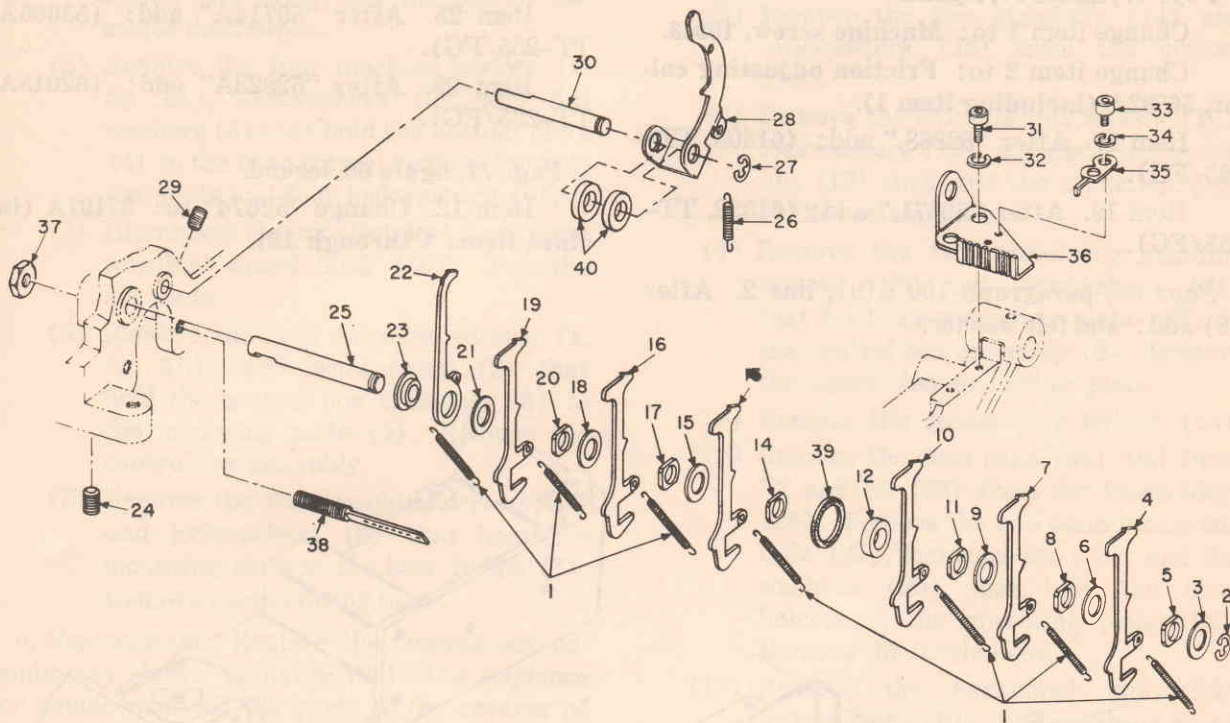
(Superseded) Tape transmitter operating levers, exploded view.
